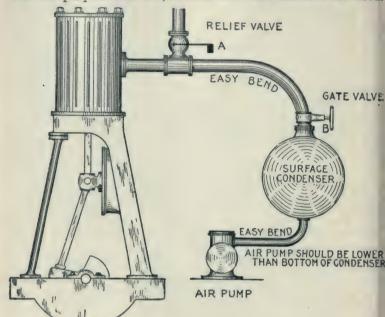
,724.—View of engine and condenser, showing how to arrange the piping to secure good vacuum. Locale the condenser as near the engine as possible; use easy bends instead of elbows; place the pump below bottom of condenser so the water will drain to pump. At A is a relief valve, for protection in case the condenser become flooded through failure of the pump, and at B is a gate valve to shut off condenser in case atmospheric exhaust is desired to permit repairs to be made to condenser during operation. A water seal should be maintained on the relief valve and special attention should be given to the stuffing box of the gate valve to prevent air leakage. The discharge valve of the pump should be water scaled.
